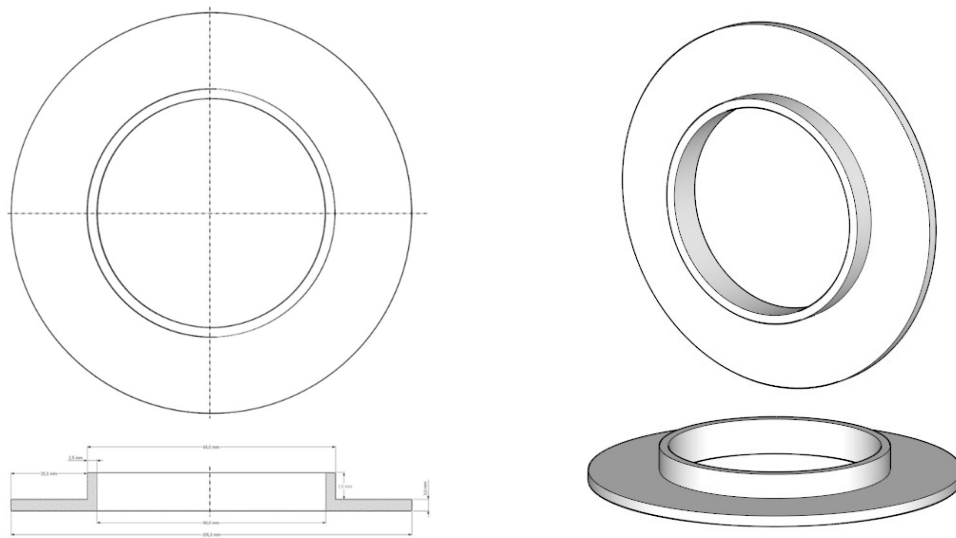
Model of the centering ring for the capsule – 3D printing
